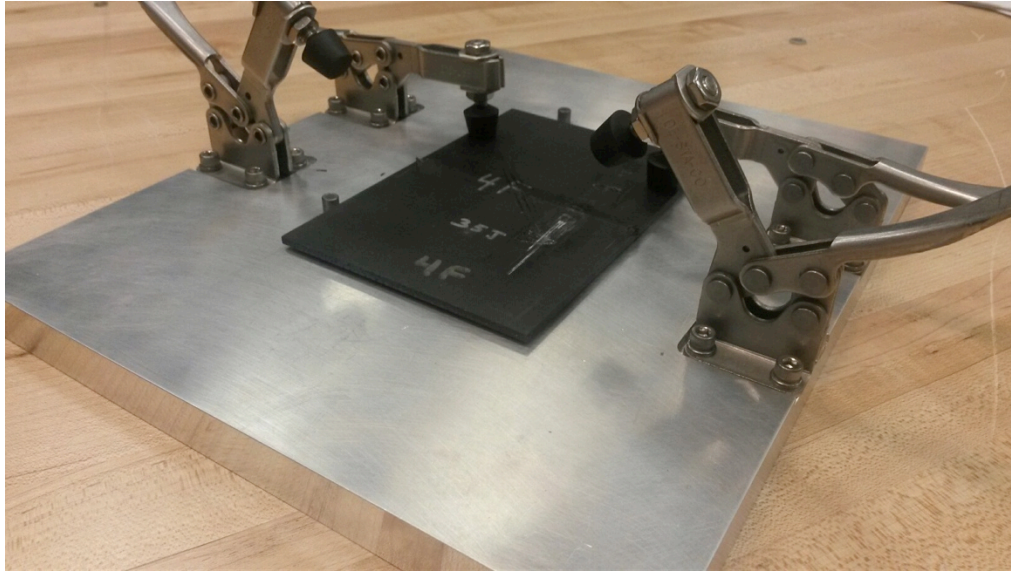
ASTM 7136 Impact Fixture
